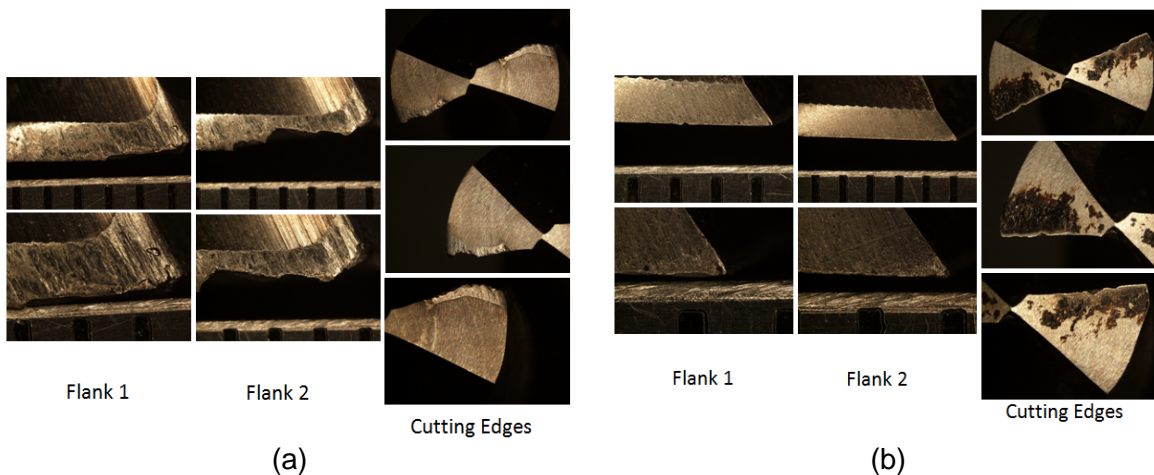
Optical microscope images of (a) drill M1 and (b) drill V1 after machining 83 holes.
